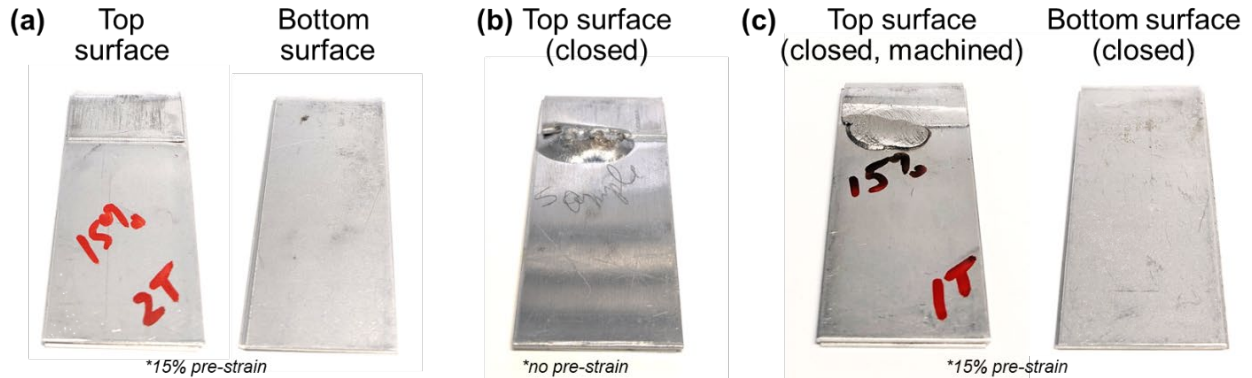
Photographs of hemmed sheet samples (a) before processing, (b) after deposition, but before machining, and (c) after deposition and machining showing no deformation of the bottom surface of the sheet. Source: ORNL.
